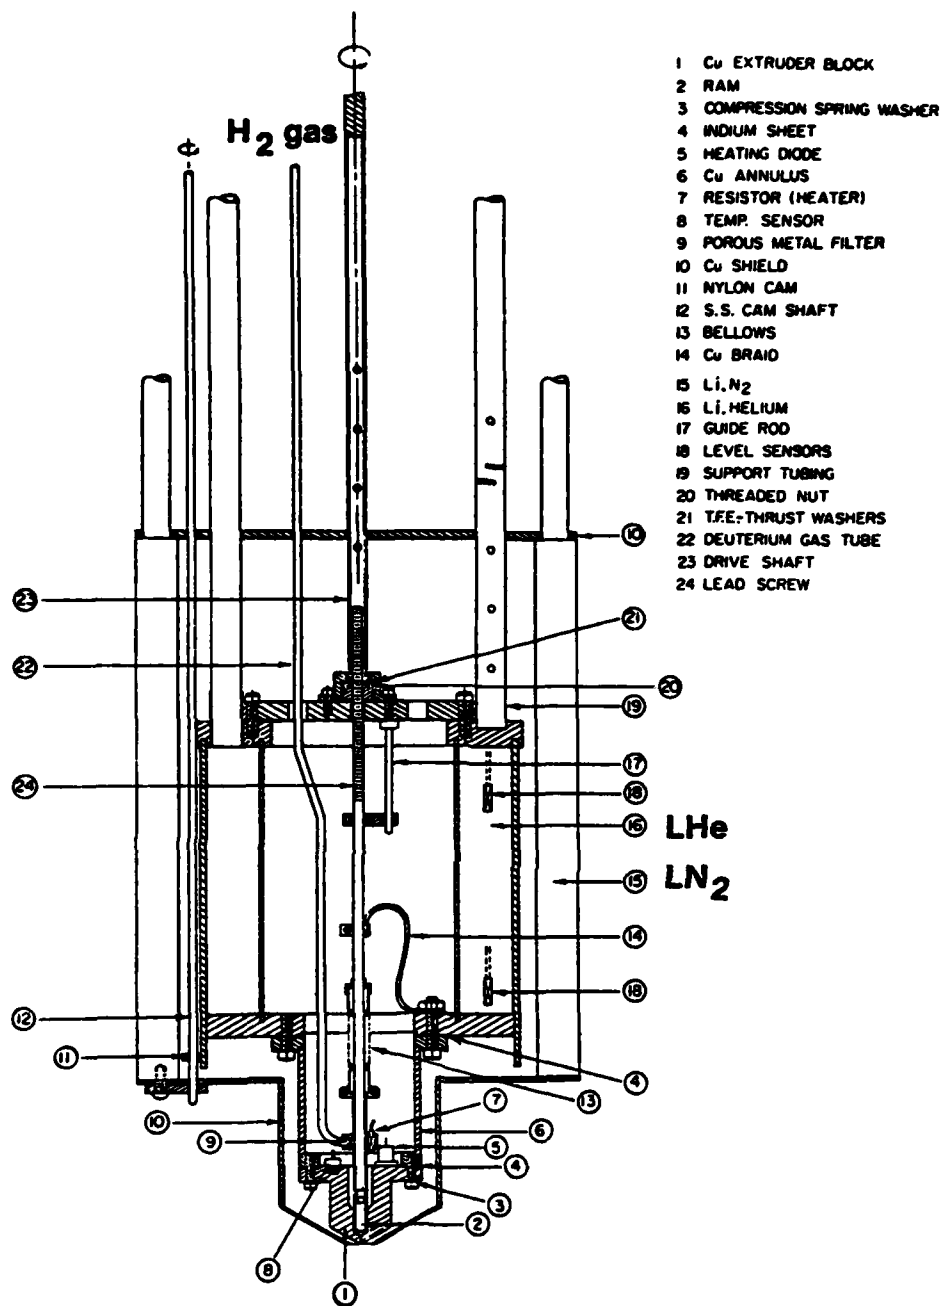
Mechanical drawing of the University of Rochester deuterium extruder which is used in the pellet dropping system.
